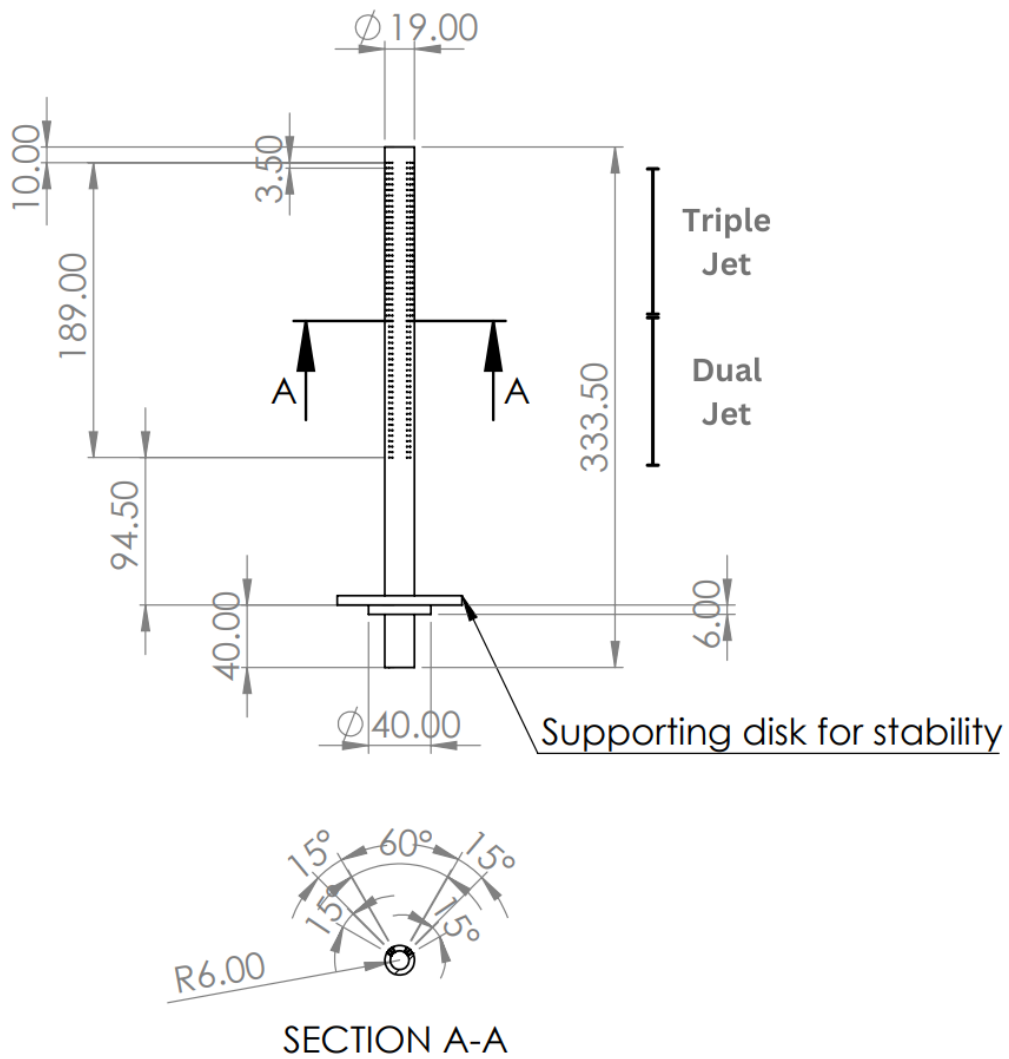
AT technical drawing. While this is not a complete drawing, some details have been removed to promote clarity and focus on the outlet hole configuration.
